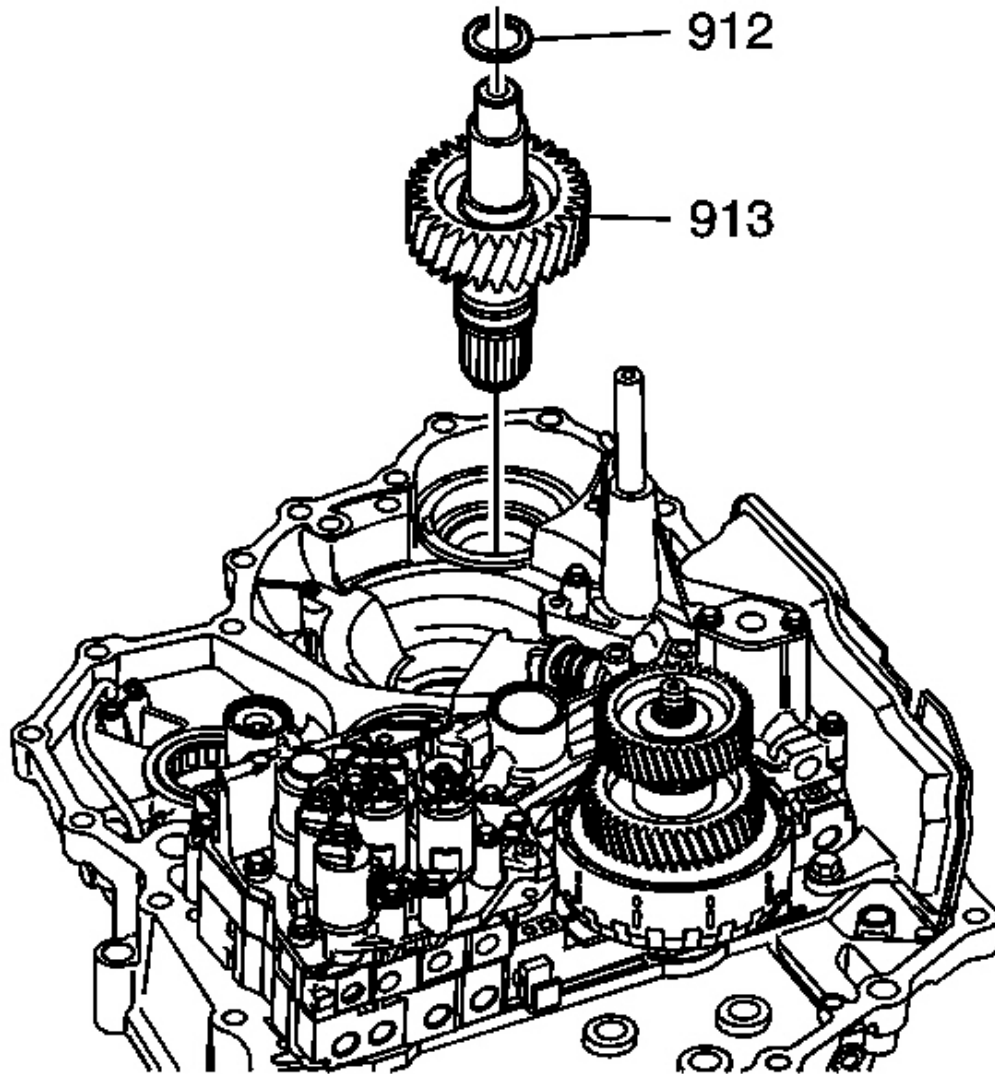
Transfer Case Selective Shim, Input Gear & Shaft Assembly
